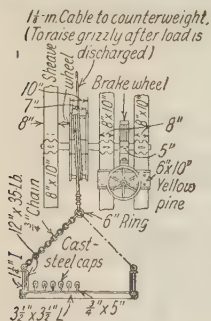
Movable sorting grizzly, Port Henry Iron Ore Co.
